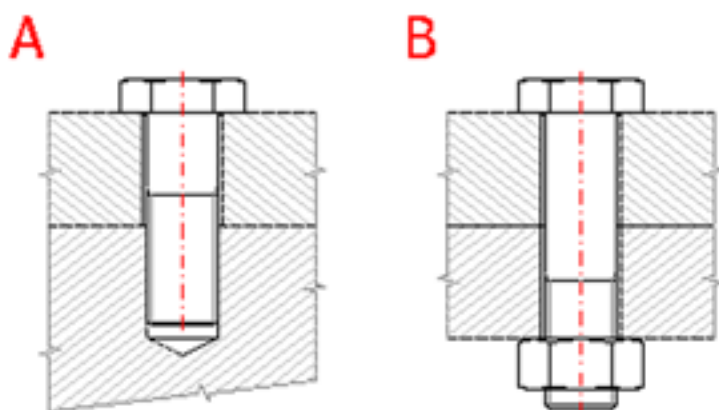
Bolted joint type. A - blind hole, B - through hole.
